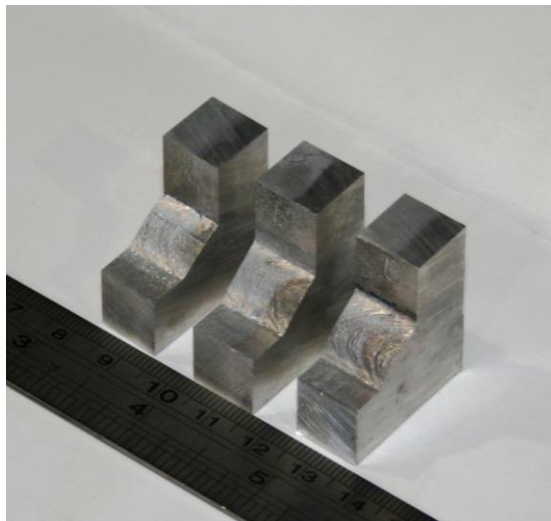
Sectioned crack assessment samples (12.7 mm thick plate)
